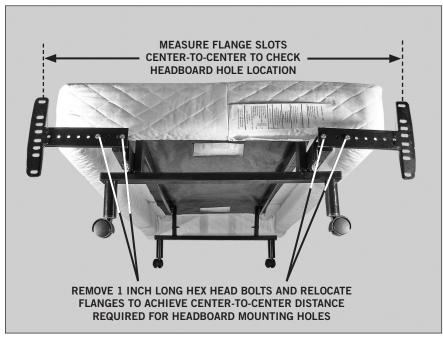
Headboard bracket measurement and adjustment to accept headboard.
